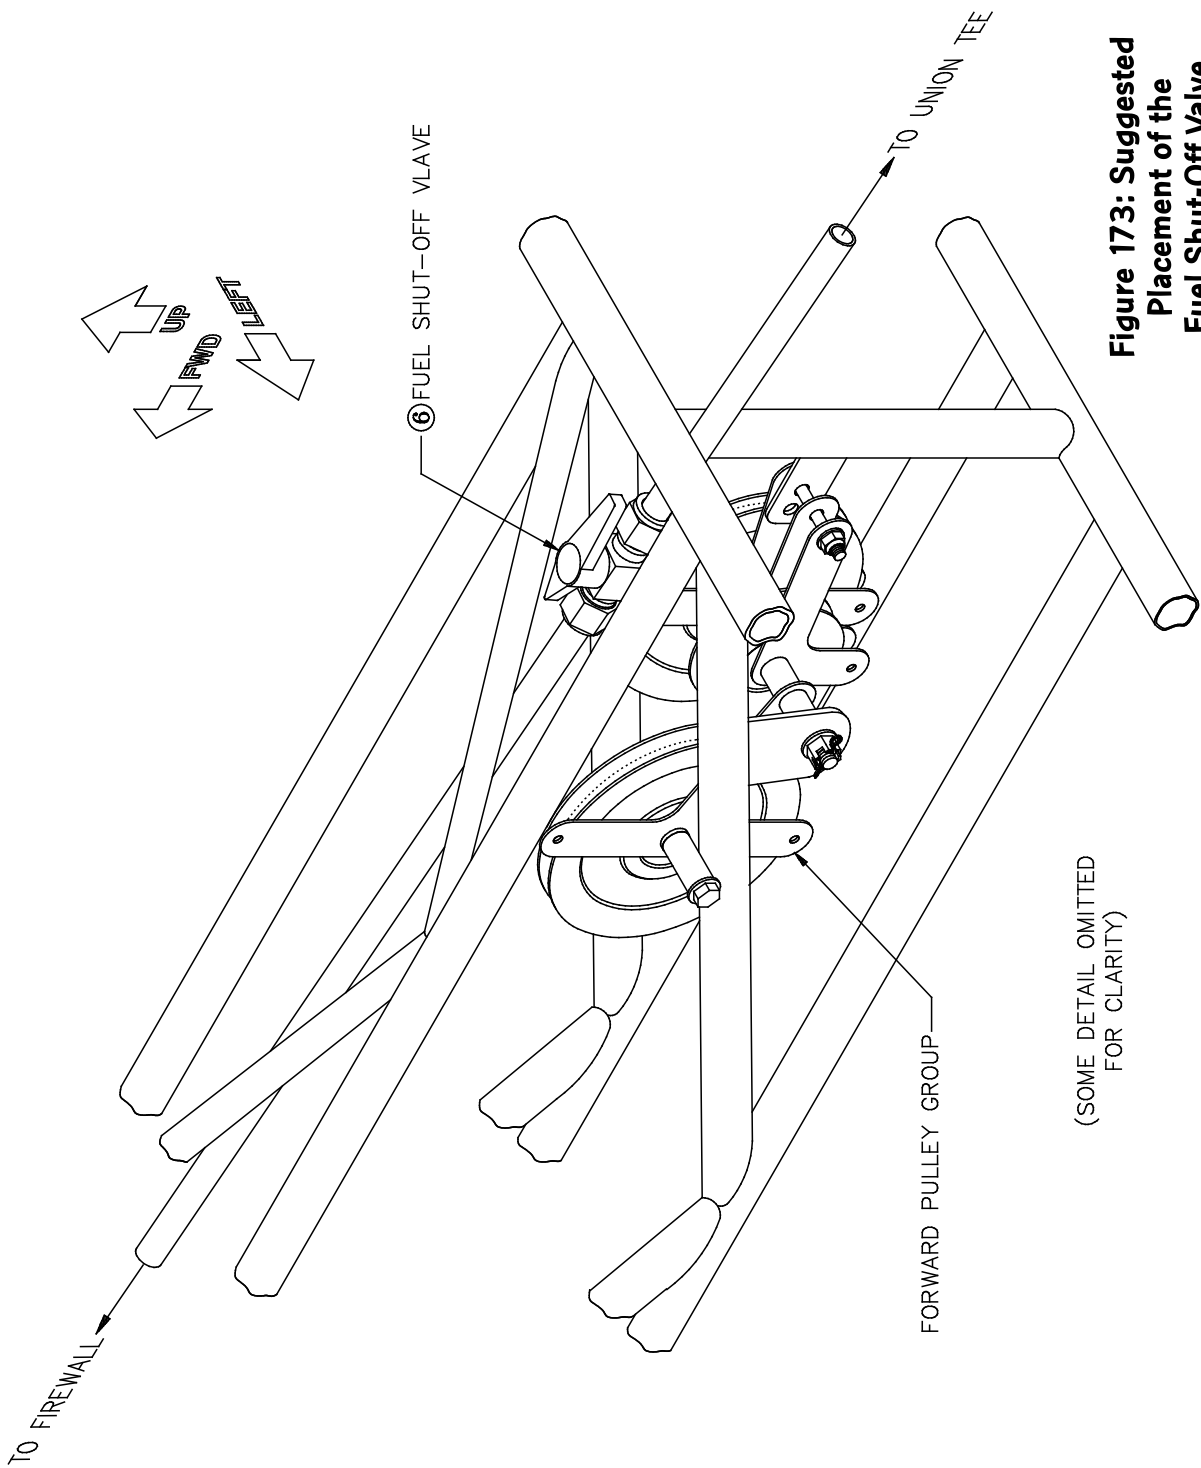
Suggested Placement of the Fuel Shut-Off Valve
